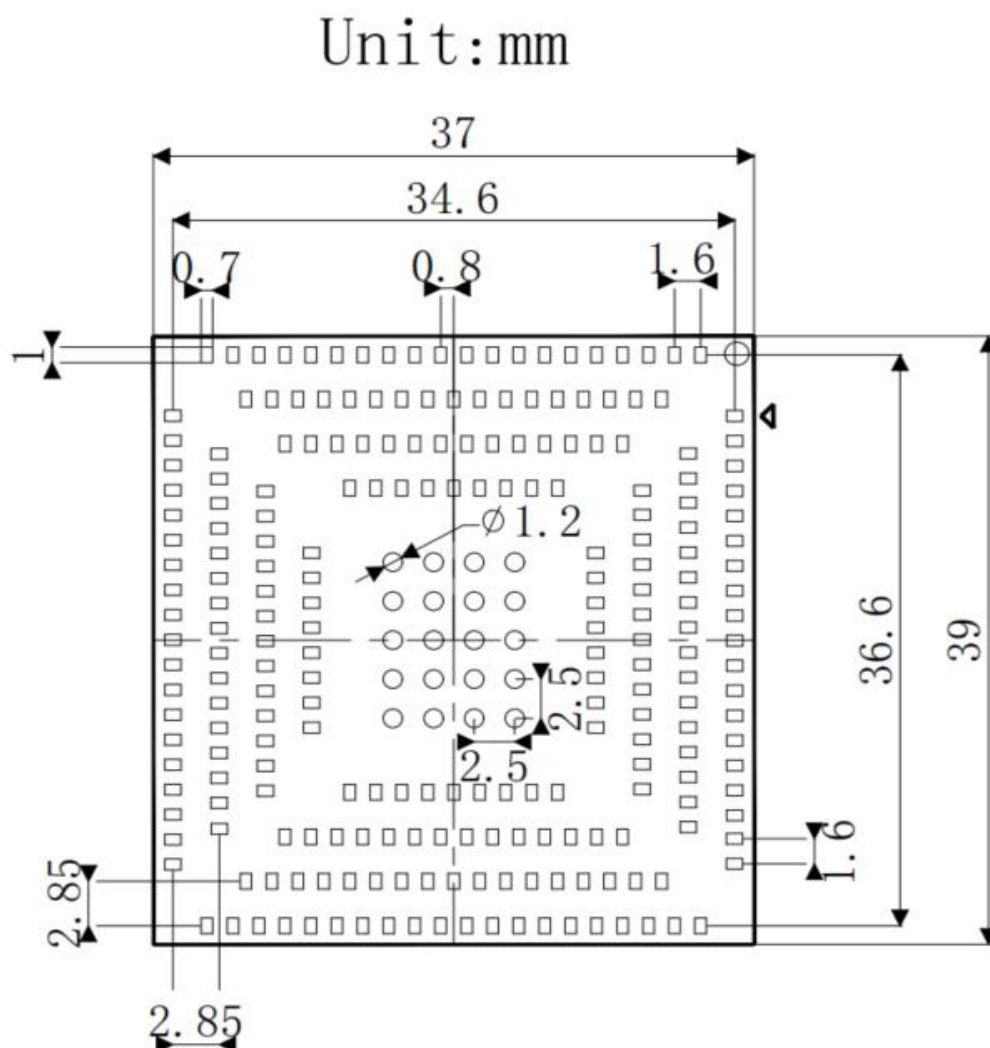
Footprint on base board for populate SOM(unit: mm)
